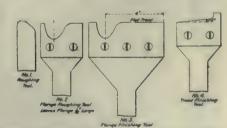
Tools for Turning Tires on a Sellers Wheel Lathe,
